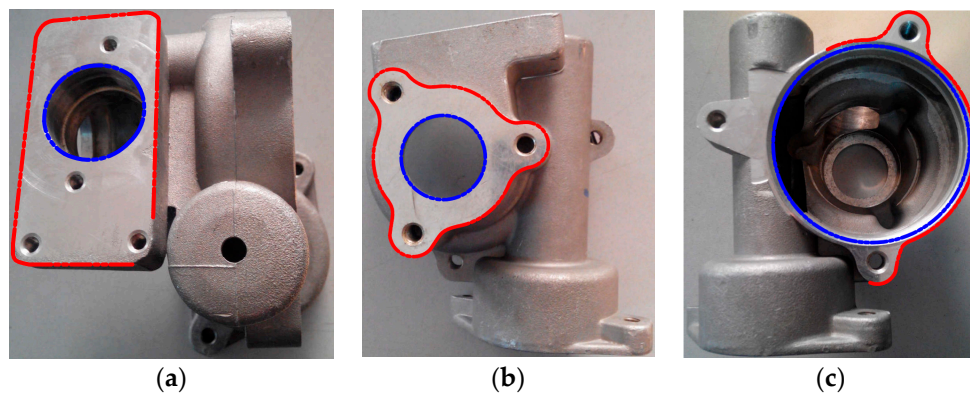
Experimental deburring of multifaceted edges for automobile steering booster housing: (a) top facet; (b) distal side facet; (c) proximal side facet.
